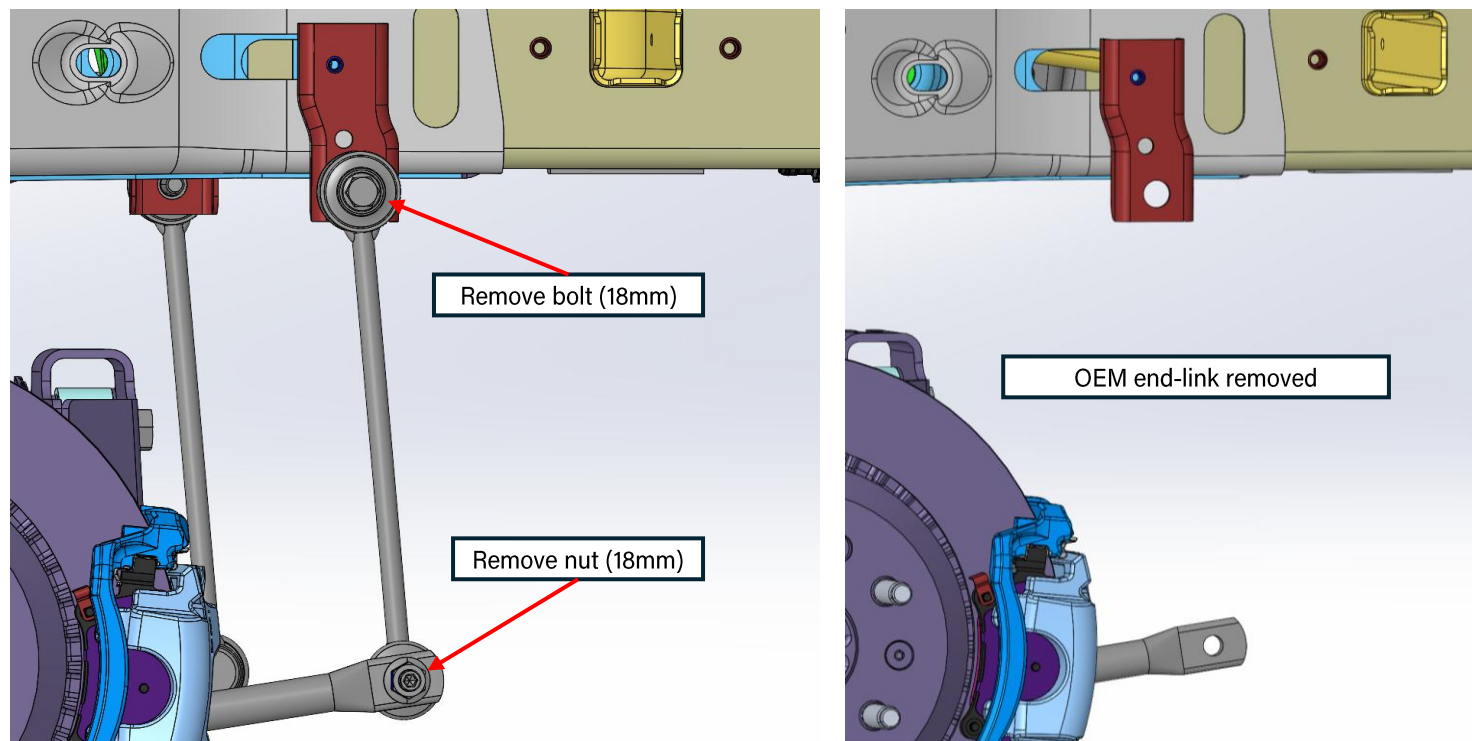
Driver-side OEM end link before and after removal (CAD photo)
